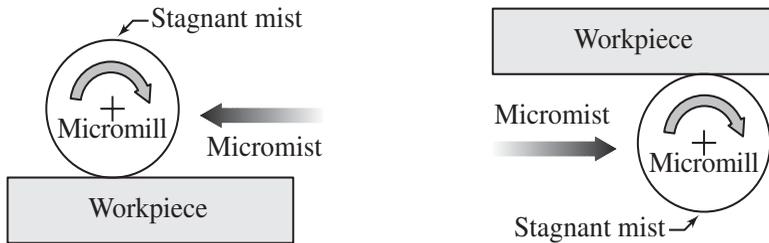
Practical machining setups of tool and workpiece to avoid stagnant zone.
